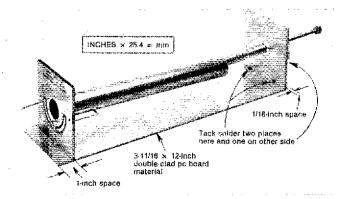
The beginning stages of cavity-case assembly. The two ends are tack-soldered to the side section and the two tubes are centered one inside the other before the soldering is completed.
